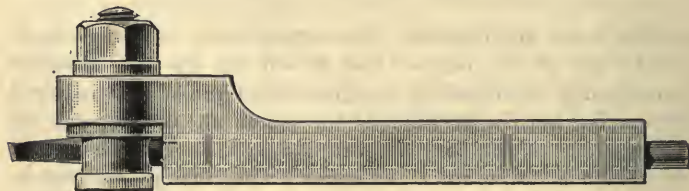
PATENT TOOL-HOLDER FOR INSIDE THREADS.
